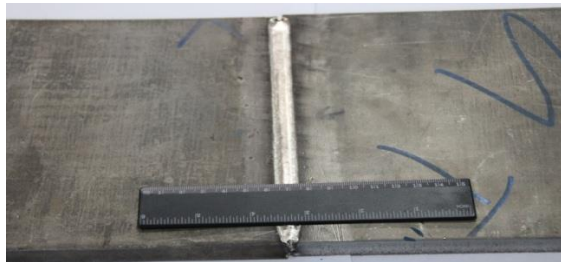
Right side of the weld joint of titanium alloy.
